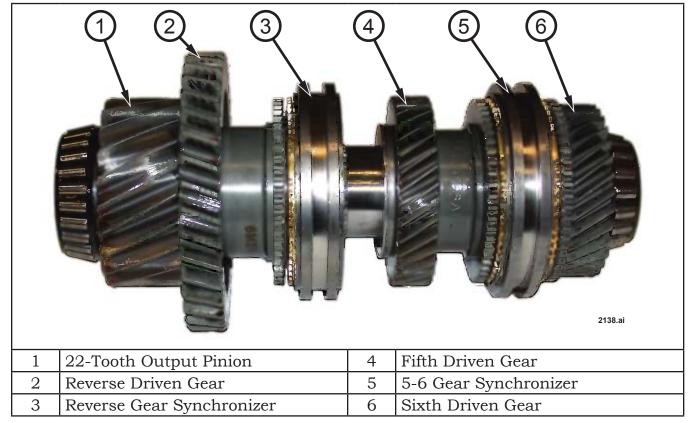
DMT6 5-6-R Output Shaft and Synchronizers
